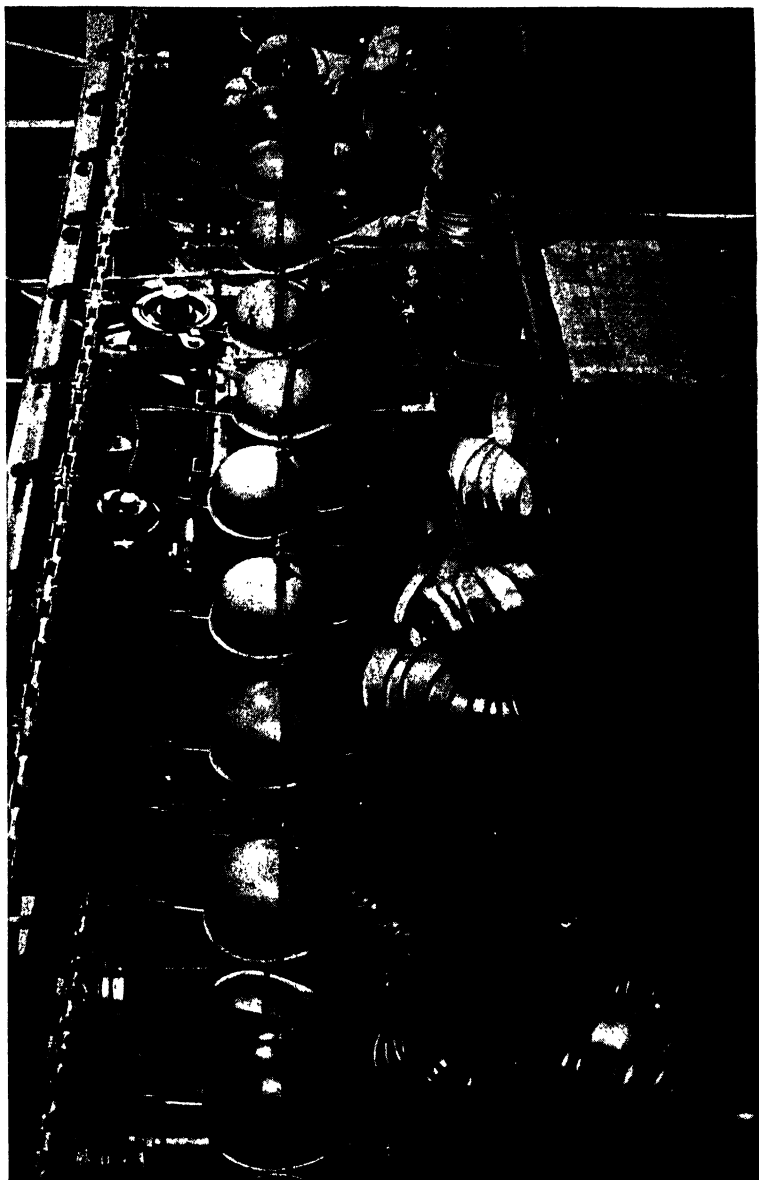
PLATE XXXVIII.—Manufacturing steel helmets for the army. This picture shows a monorail equipped with an endless-chain conveyor leading from the pressroom to the welding and finishing departments. After being drawn, formed, and trimmed, the helmets are carried along by the chain to other departments, where welding and finishing are done. (O.W.I. photograph.)
